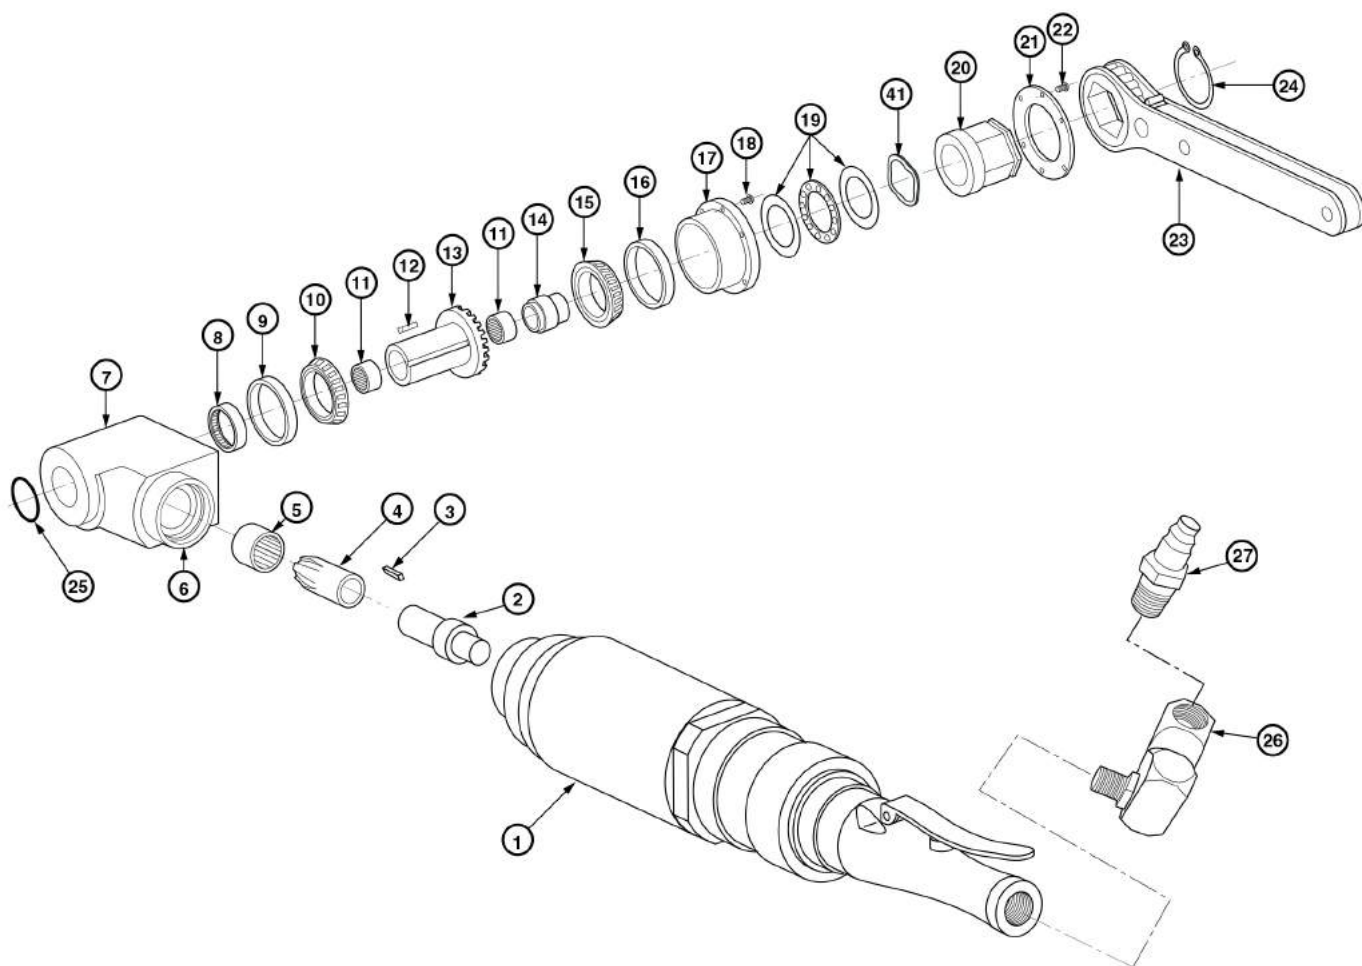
BG44 BOILER GUN - HIGH VELOCITY, WRENCH FEED ASSEMBLY (P/N BG44HVWR)
